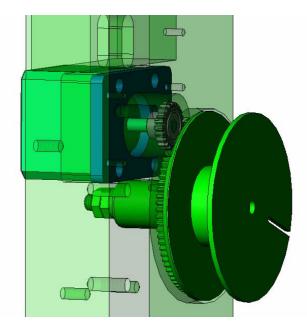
CAD illustration of speed control motor. A separate motor is used to control the speed of the wire. Coupled with gear and shaft this motor is connected to the wire collection wire pool
